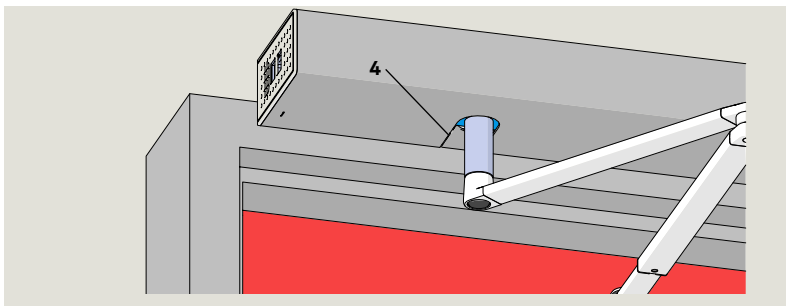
Spindle cap installation, cover bottom, 8816 side
